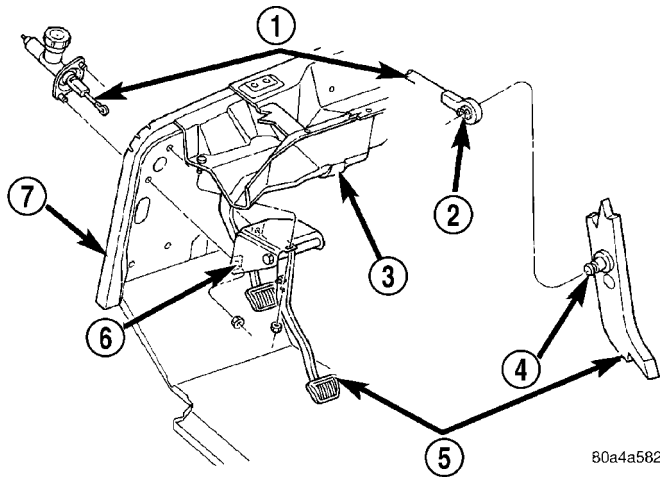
CLUTCH PEDAL MOUNTING - LHD
